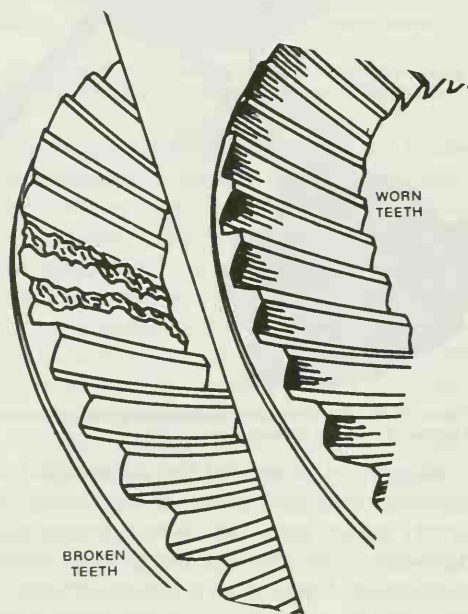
Inspect the ring gear for worn or broken teeth. (Chevrolet Motor Division of General Motors Corporation)
